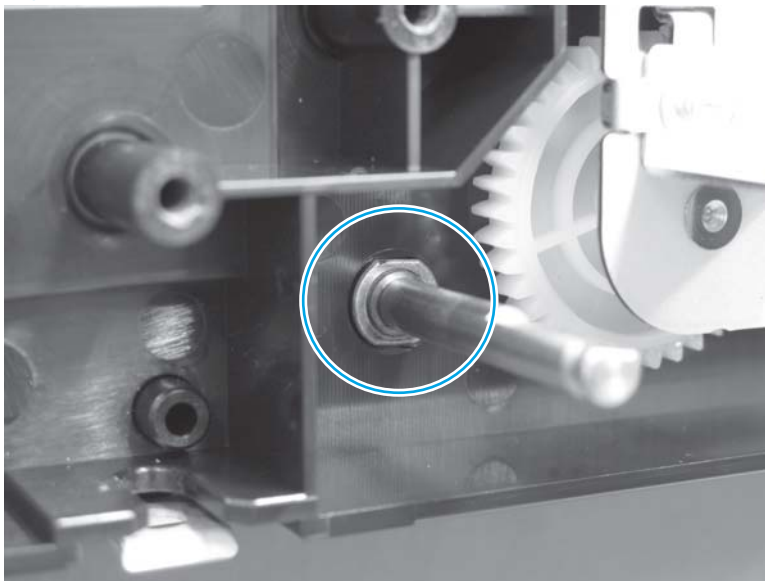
Remove the IPTU side panel assembly (6 of 6)
